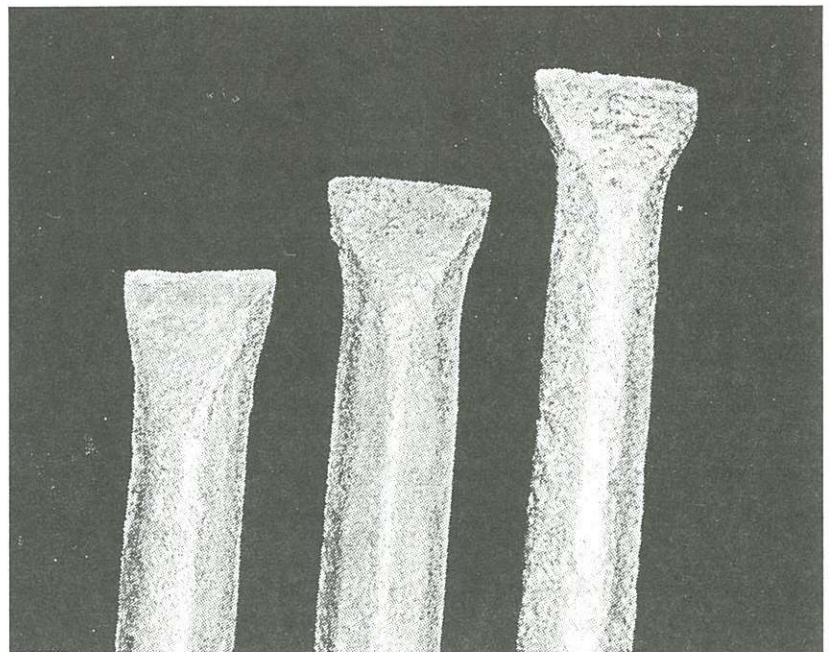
Set of three, 7/8 in. stock, drills found together in old workings which have straight cutting edges and no upsetting before forging. (cir. late 1890's)
